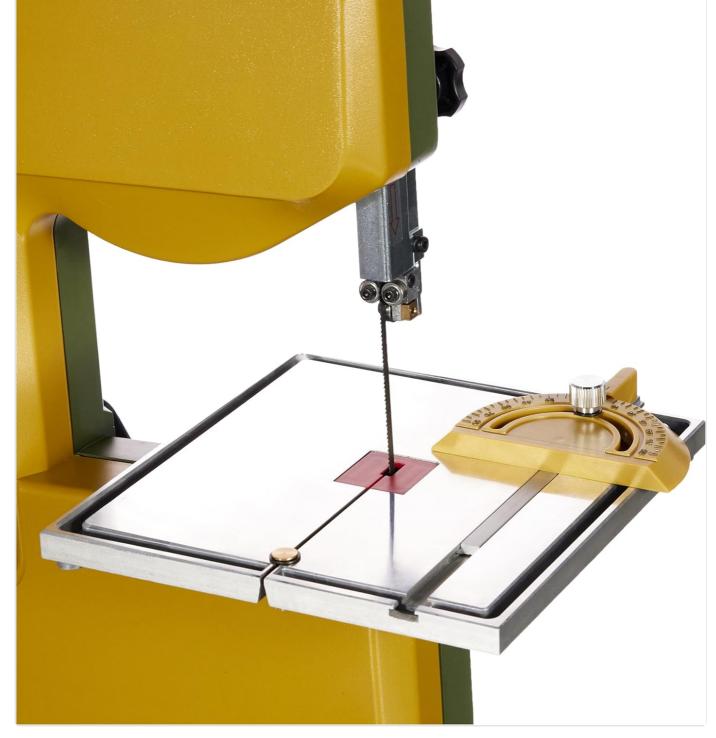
Detailed view of the adjustable work table and miter gauge, allowing for precise angle cuts.
